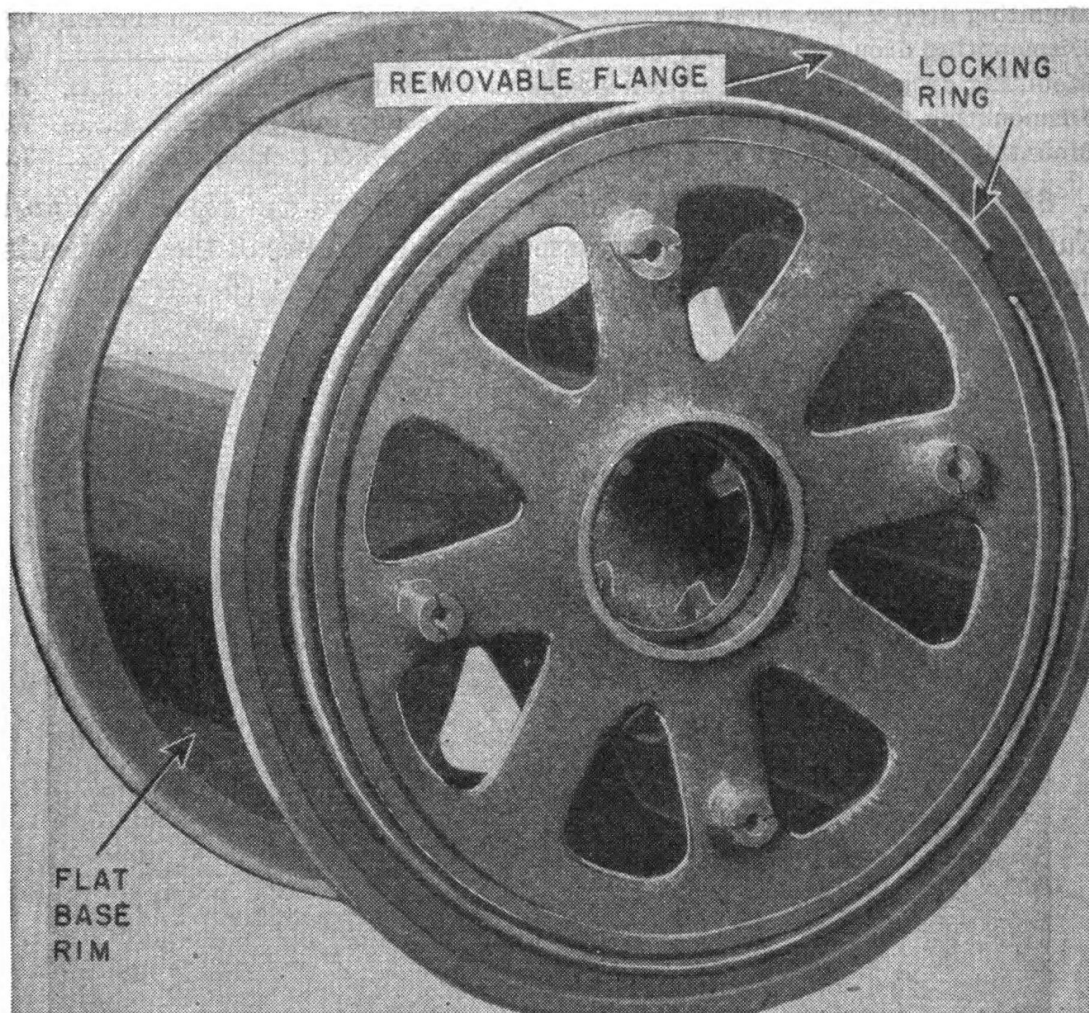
Flat base wheel with removable side flange and locking ring.
